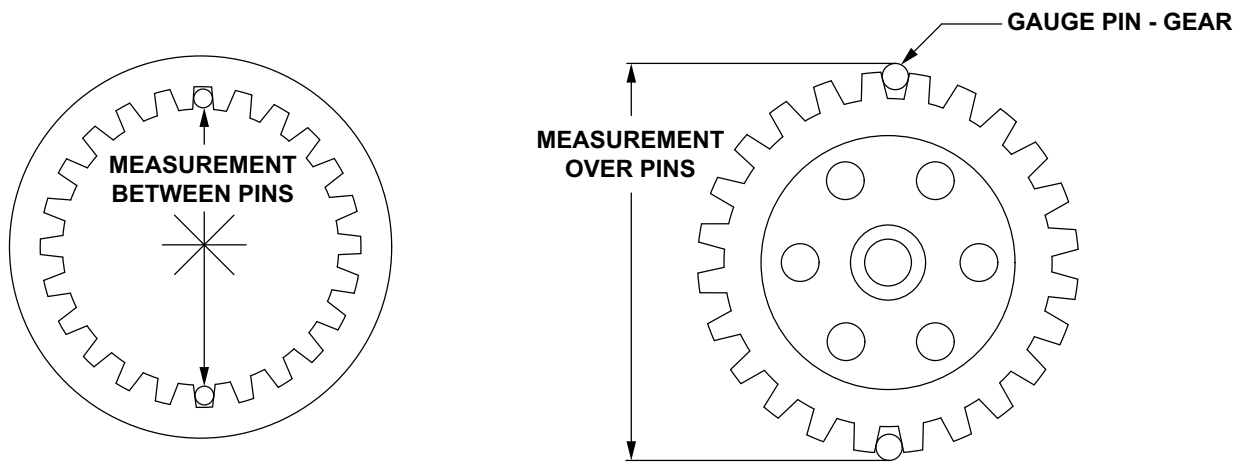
Gears — Methods for Spline and Teeth Wear Measurement
